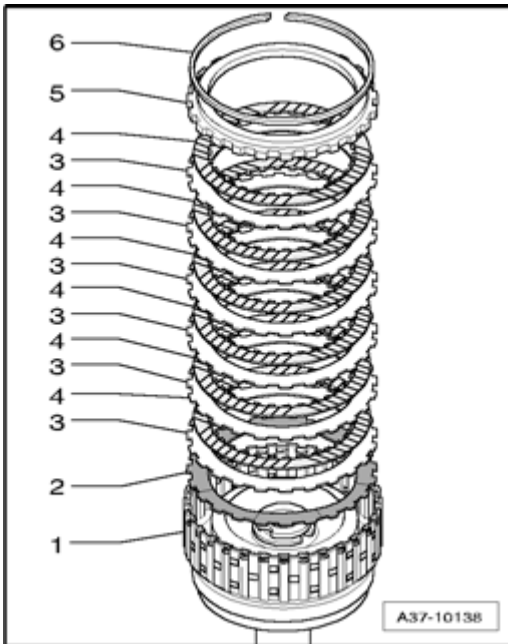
Cylinder "A", Wave Washer, Outer Plates, Coated Plates And Outer Plate
